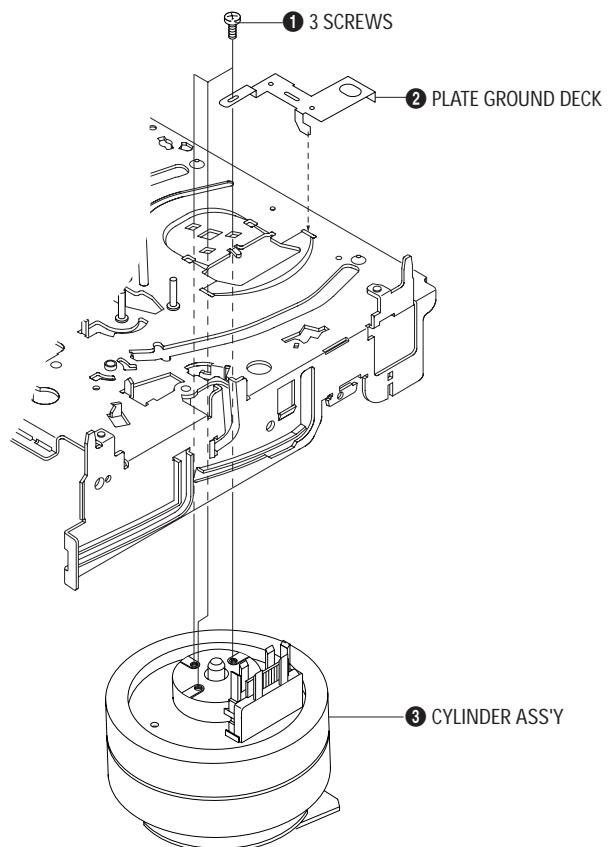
Plate Ground Deck, Cylinder Ass'y Removal
